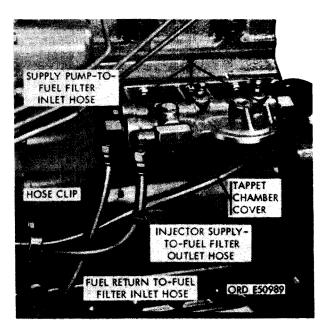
REMOVING OR INSTALLING FUEL FILTER HEAD.
